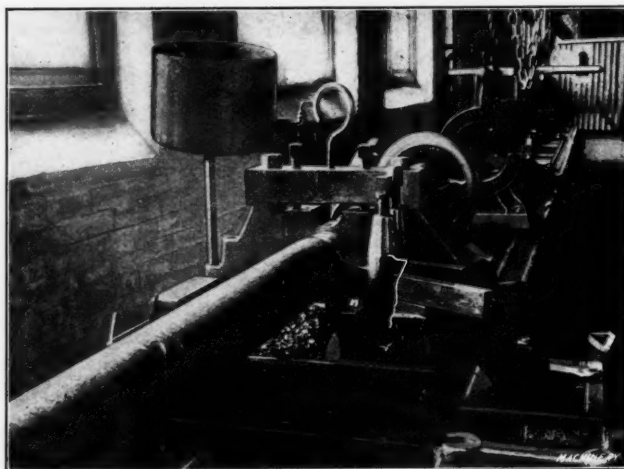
Roughing and finishing a Large Shaft in One Operation, using Two Tools
